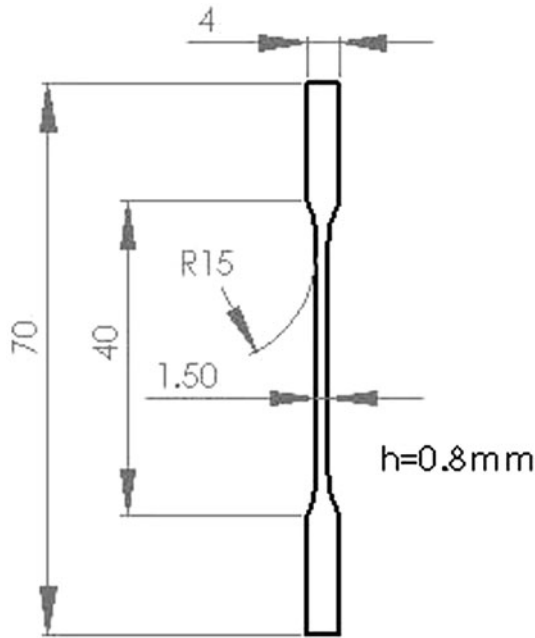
The dimension of TMNVA alloy specimen for tensile test
